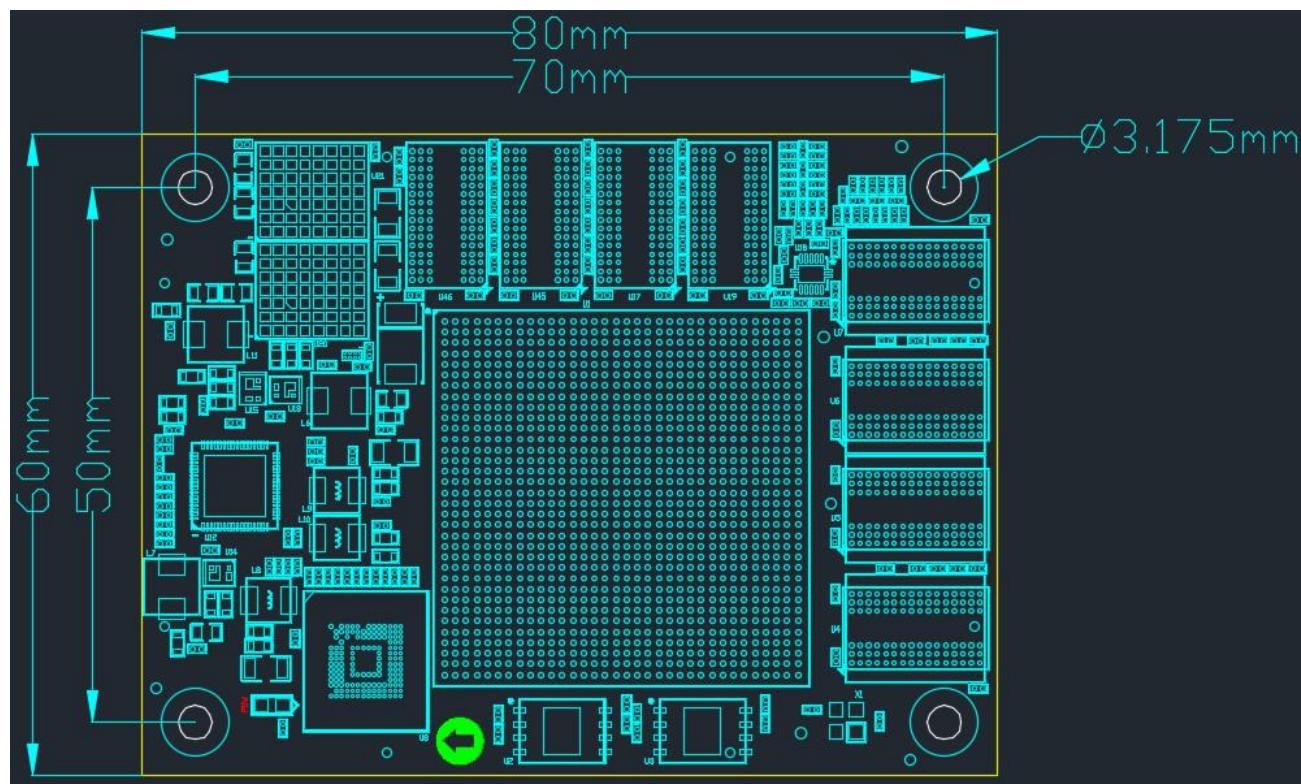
ACU7EVC Core Board Size Dimension
